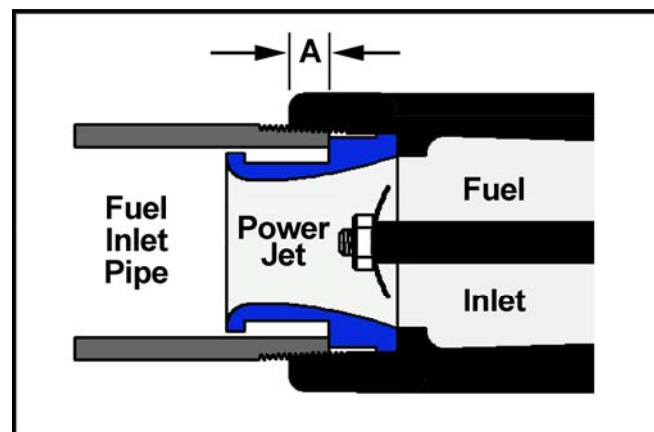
A (600VF3 Gas Inlet Module—Digester Gas or Landfill Gas)
